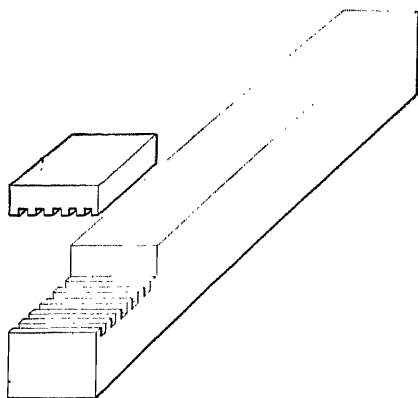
Pieces Grooved to Make Better Welds with Less Current.
